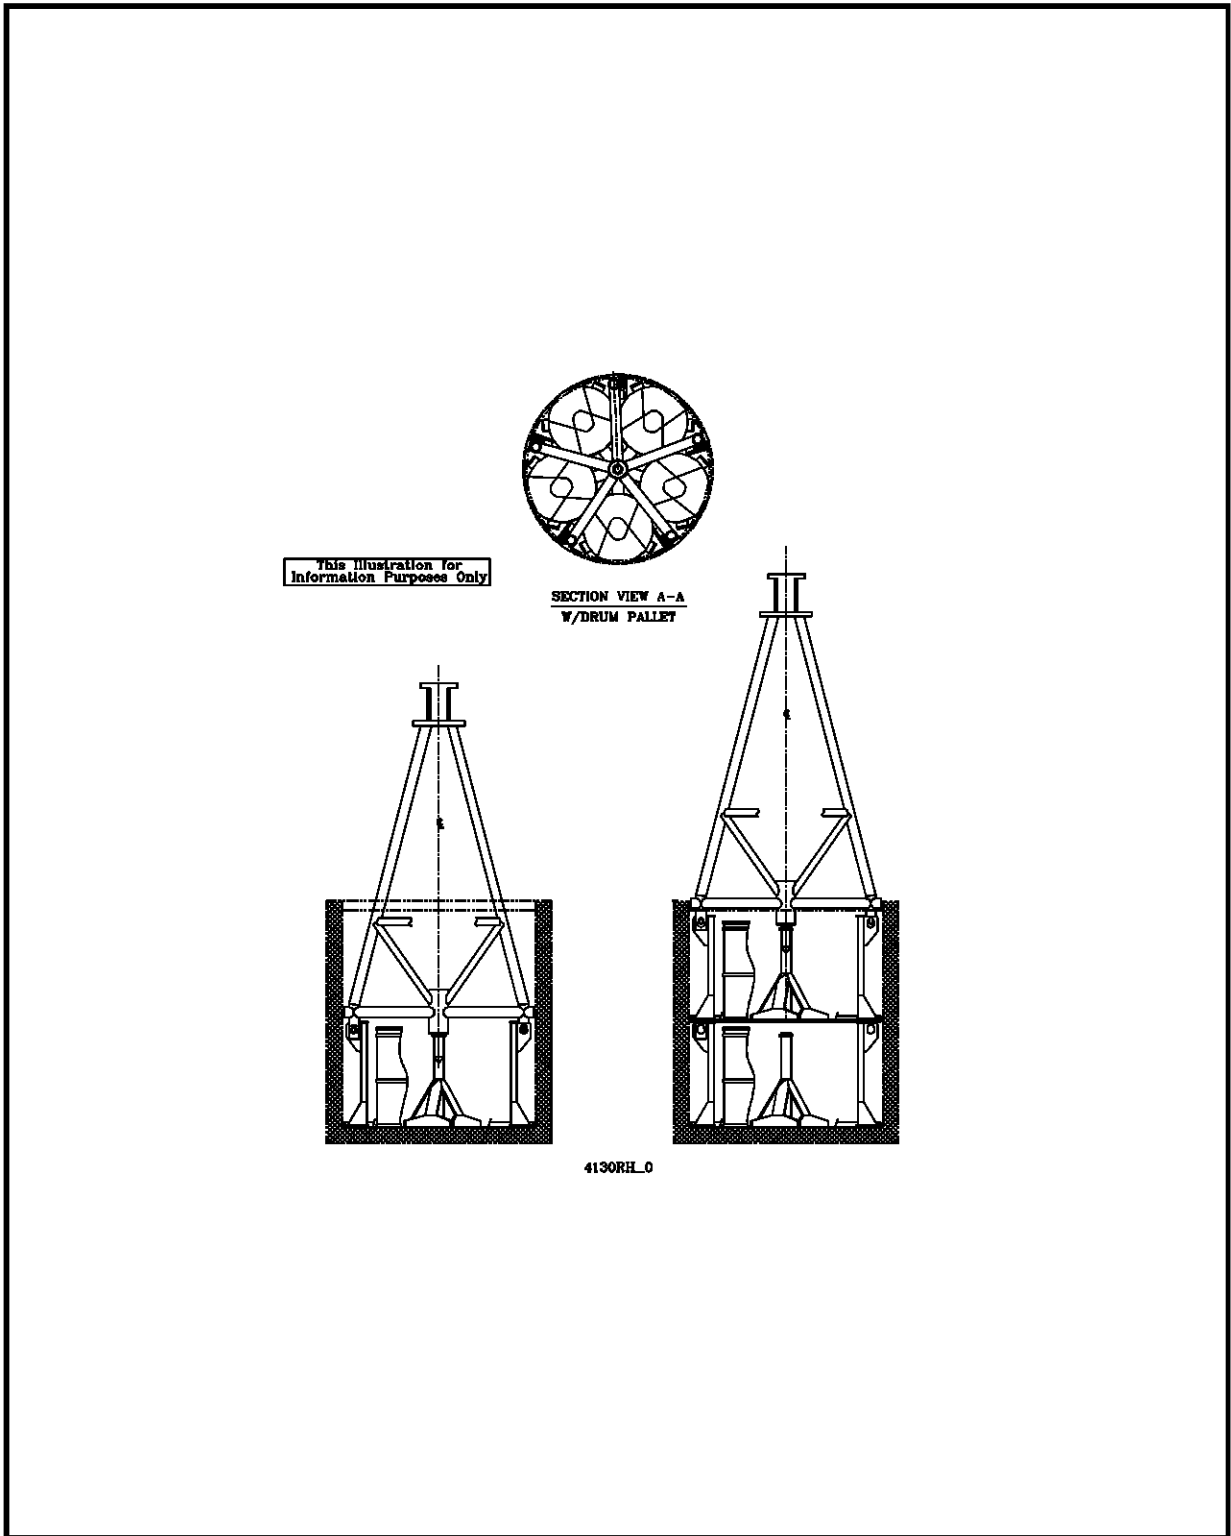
Drum Carriage Lift Fixture and Carriages
